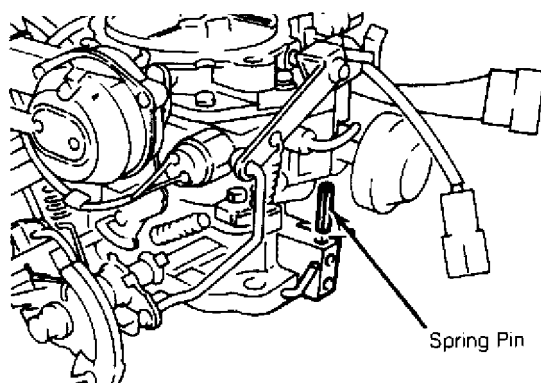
Removing Carburetor Mixture Screw Roll Pin (B2200 Carbureted)
